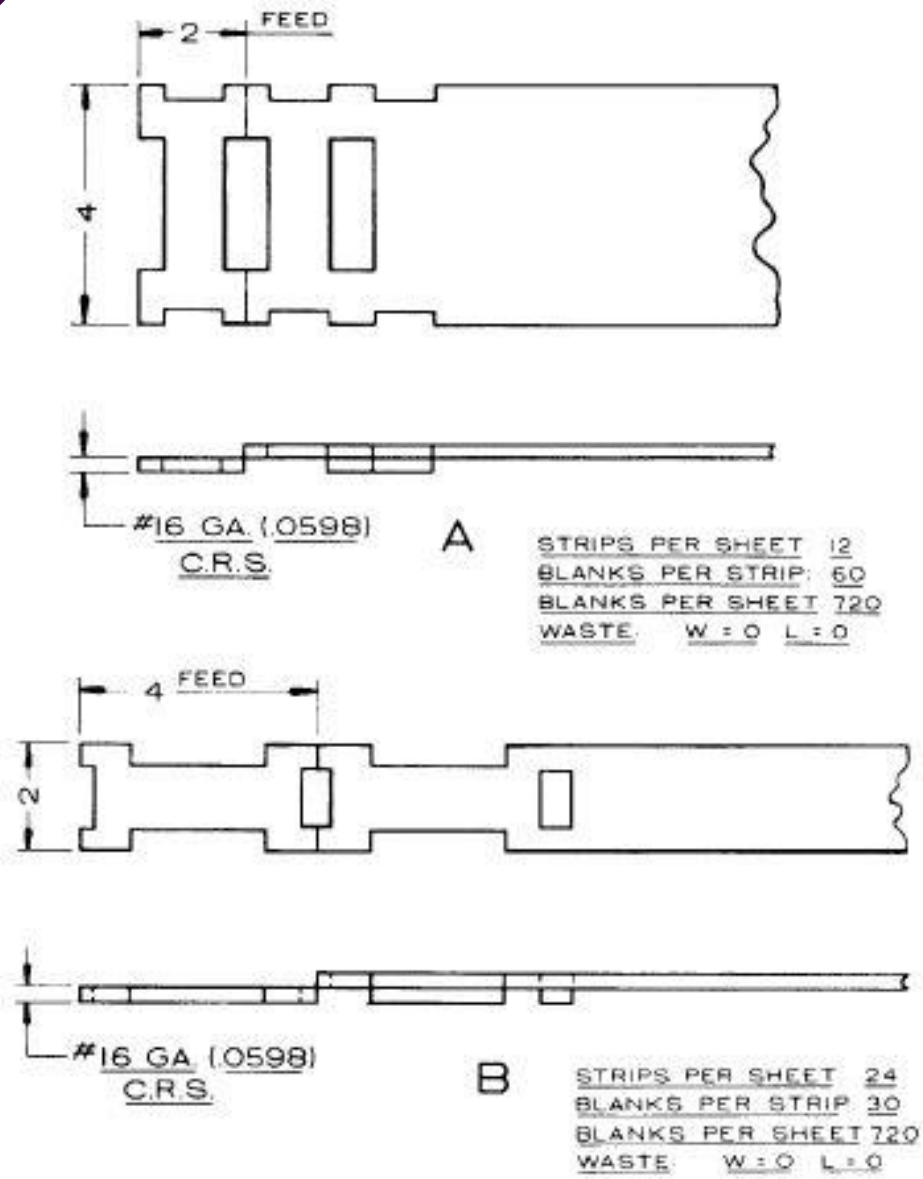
Strip layouts for blanks run either the wide (A) or narrow (B) way.
